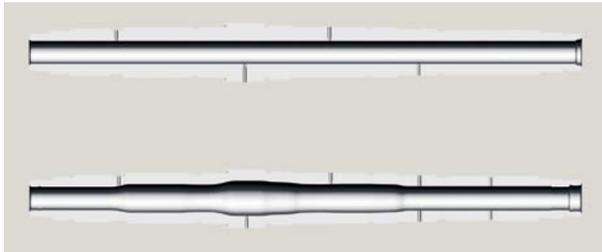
Tubular shafts as main shaft in all-wheel drive version as well as the main shaft, cold-extruded in the version without additional output
